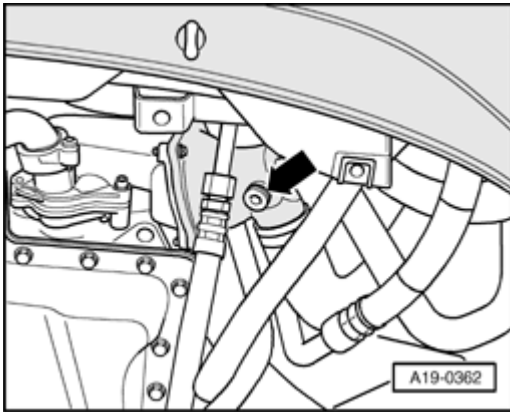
Removing/Installing Drain Plug On Coolant Thermostat Housing
